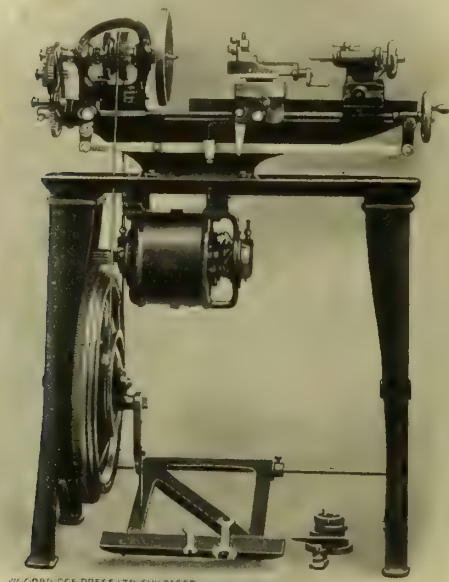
3½IN. LATHE. MESSRS. DRUMMOND BROS., LTD.
